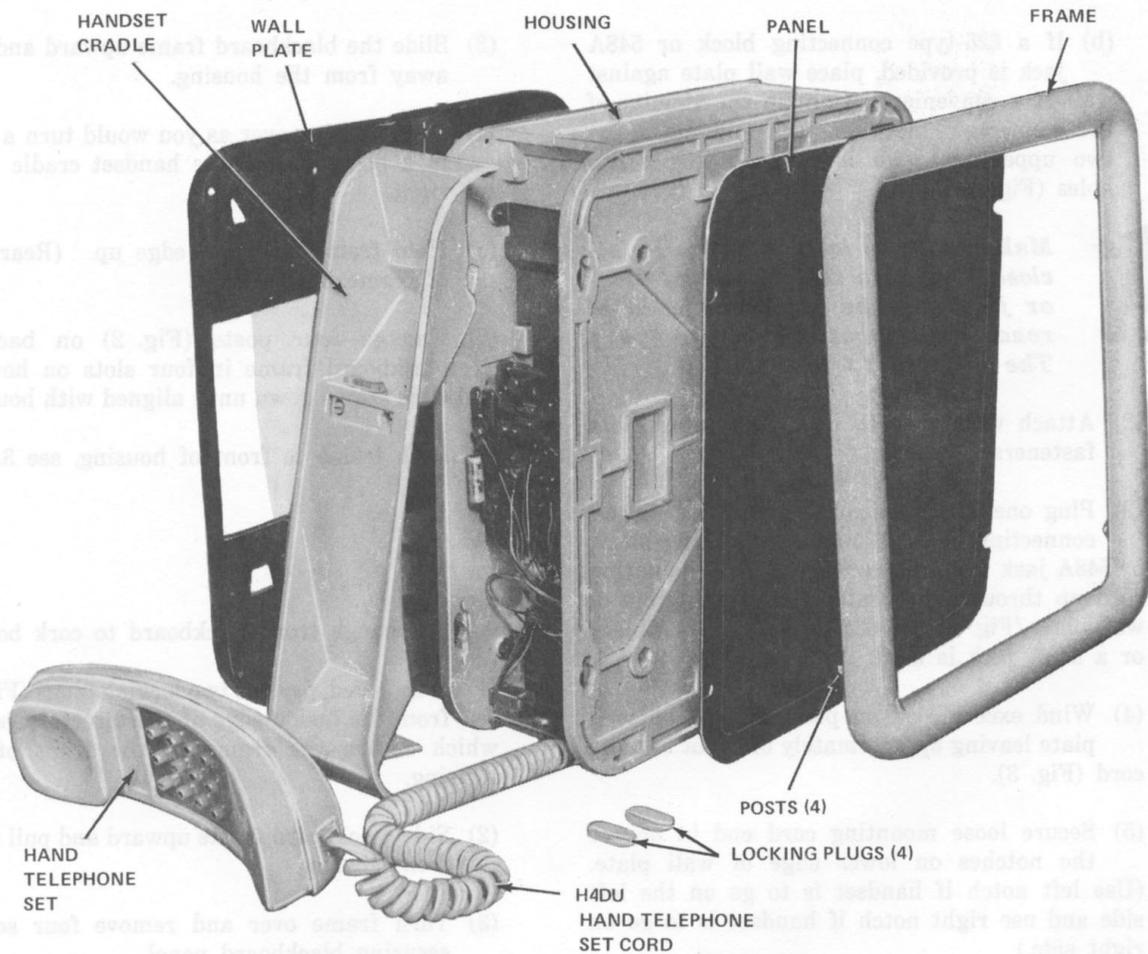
950A- or 2950A-Type Telephone Set, Assembly
